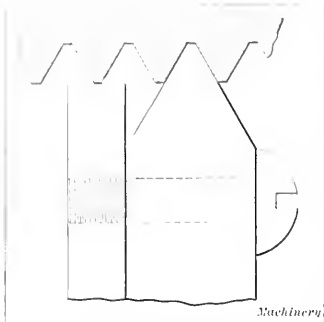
Tool for relieving Taps in Angle and on Top of Thread simultaneously
